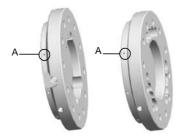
Seven holes A, on a radius of x mm from axis 6 center on the two standard tool flanges.
